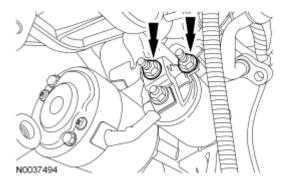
Locating Starter Wire Nuts Courtesy of FORD MOTOR CO.
